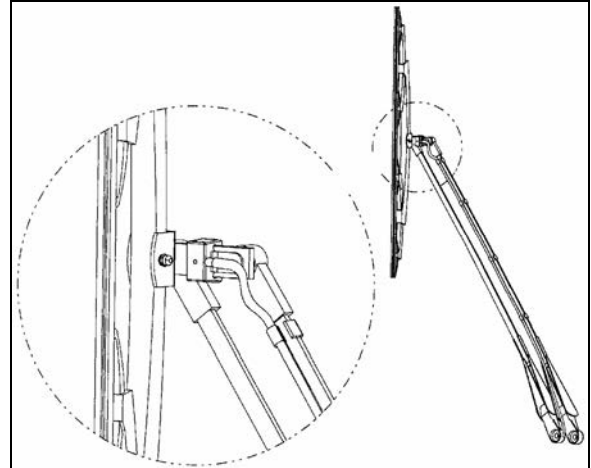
WINDSHIELD WIPER (MOTOR SIDE) 23335
